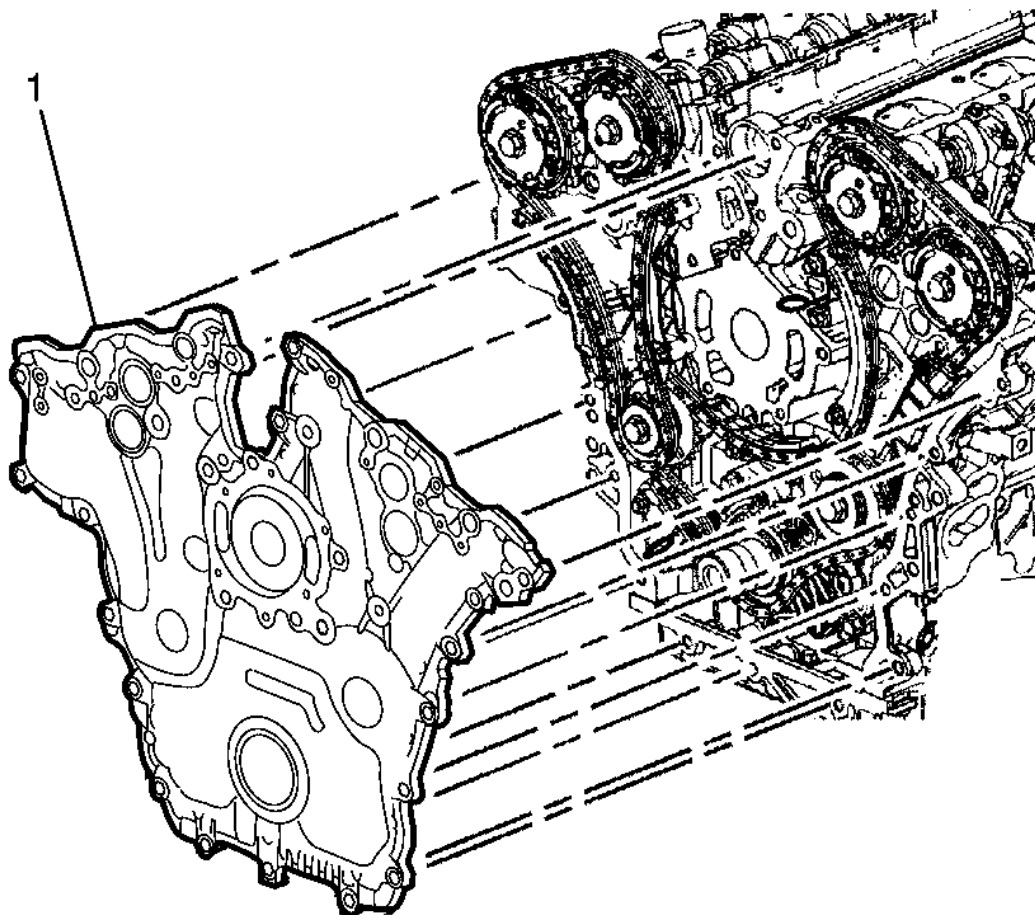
Identifying Engine Front Cover To Cylinder Block Seal
